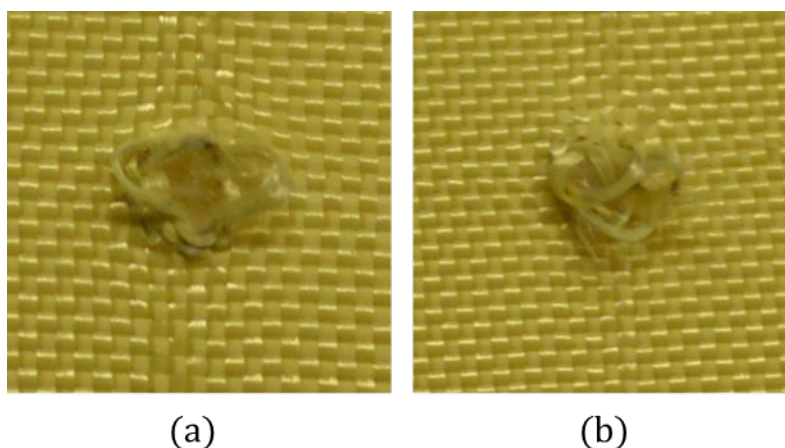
Back surfaces of impacted targets of two completely penetrating shots at 136 m/s: a) Shot 39 and b) Shot 31 for RCCs with a 0.254-mm fillet radius
